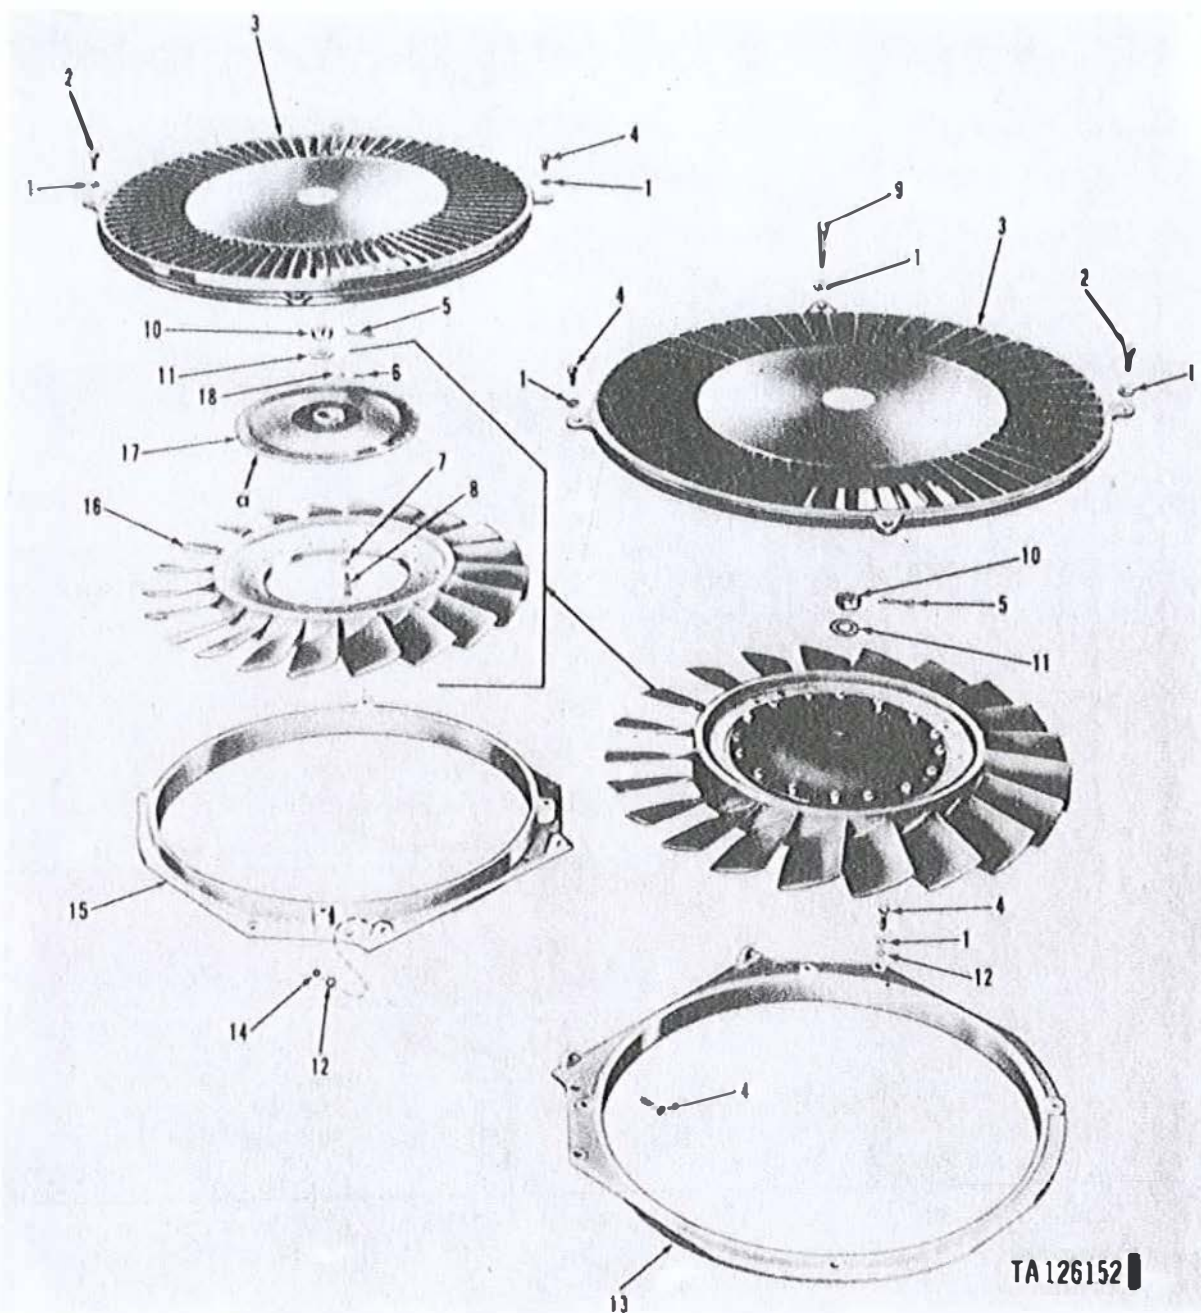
Oil cooler, oil cooler screens and associated parts - exploded view
